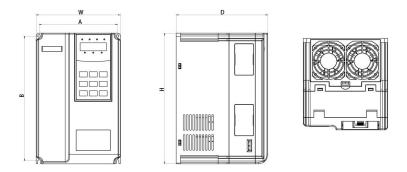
Schematic diagram of external dimension and mounting dimension of SN200G plastic structure
